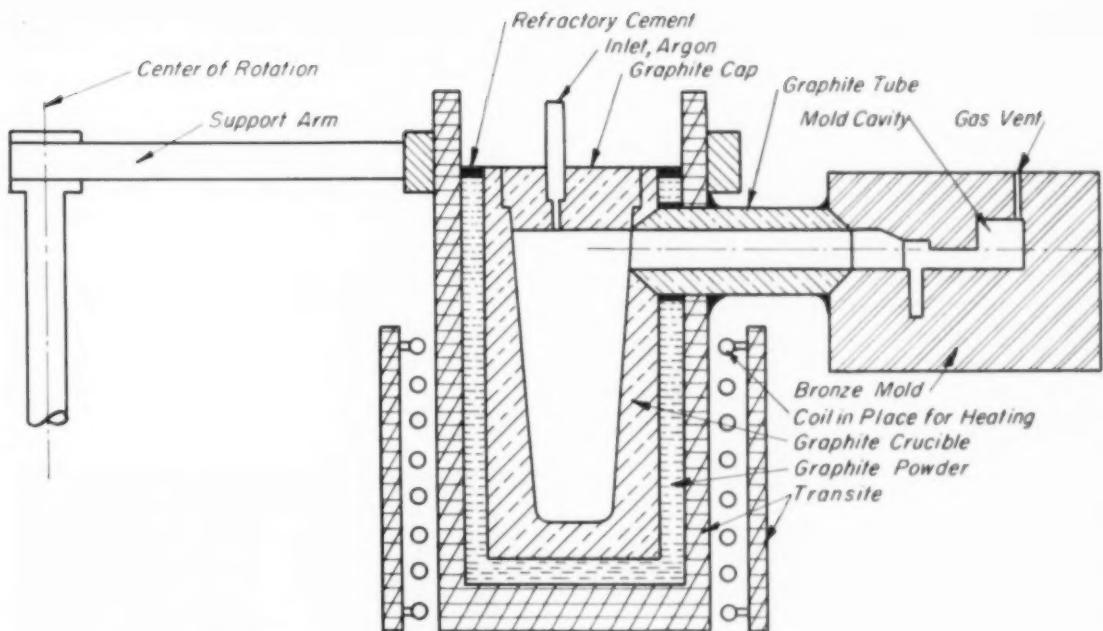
Induction Melting and Centrifugal Casting Assembly for Titanium (About Half Actual Size)
